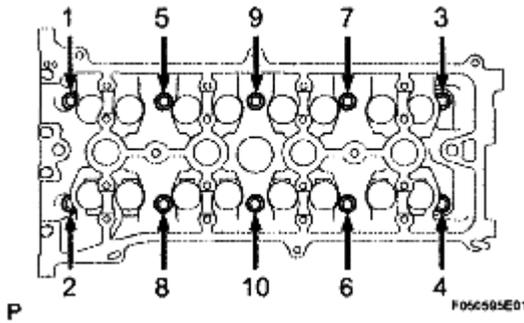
Identifying Cylinder Head Bolts And Plate Washers
